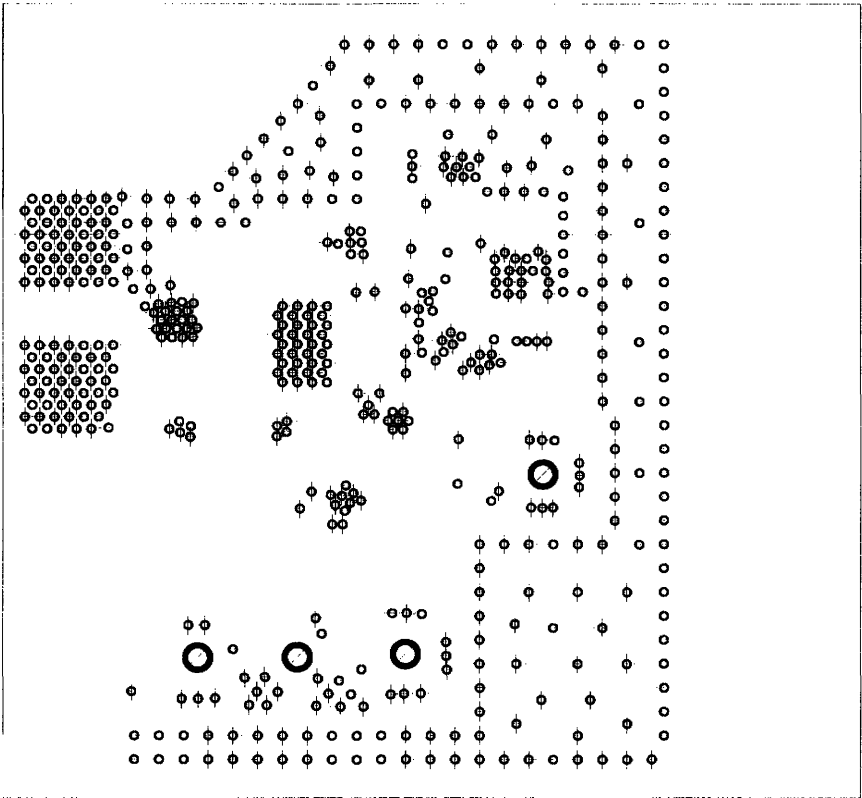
Drill map, vias, and through-hole pads of gate drive board.
